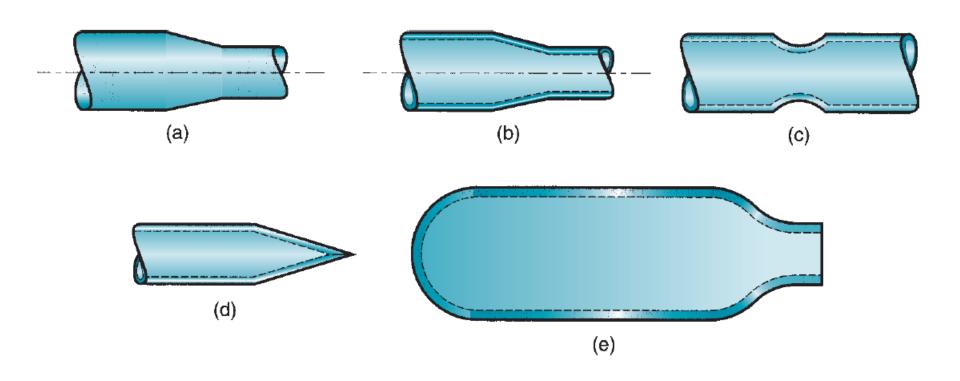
Examples of parts made by swaging: (a) reduction of solid stock, (b) tapering a tube, (c) swaging to form a groove on a tube, (d) pointing of a tube, and (e) swaging of neck on a gas cylinder.
